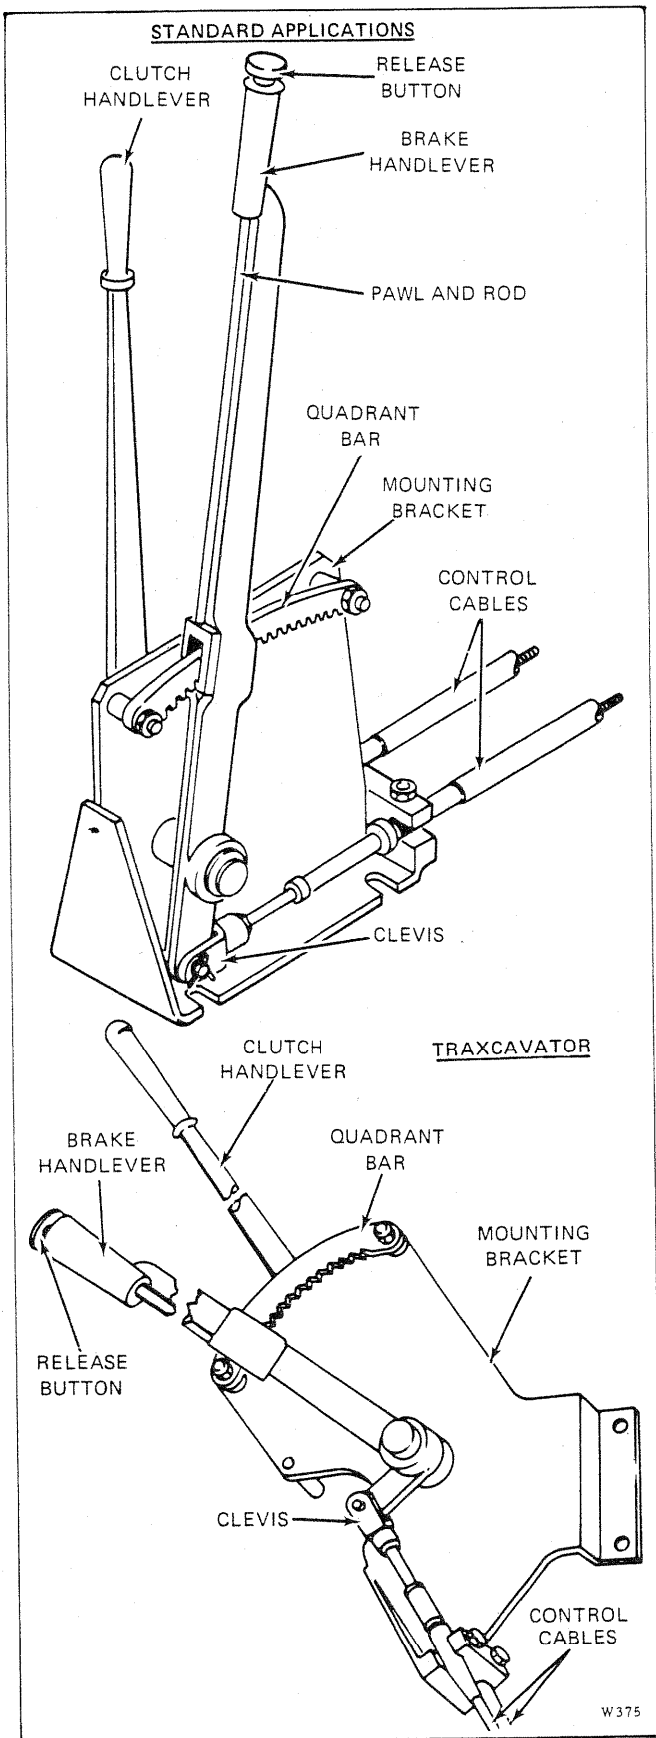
HANDLING GEAR FOR DIRECT DRIVE WINCH
